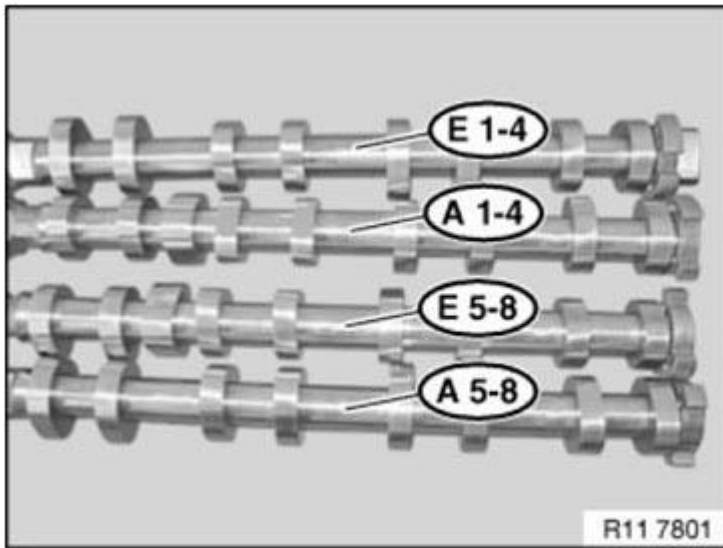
Identifying Camshaft Of Cylinder Bank Mark
